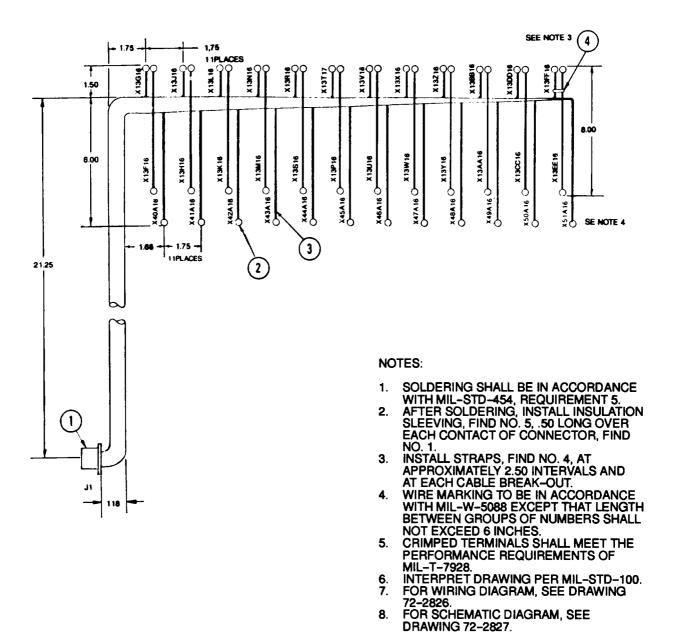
Load Bank Wiring Harness (Sheet 2 of 2), Drawing No. 72-2823
